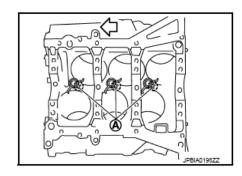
Identifying Oil Jet Dowel Pins Courtesy of NISSAN MOTOR CO., U.S.A.
